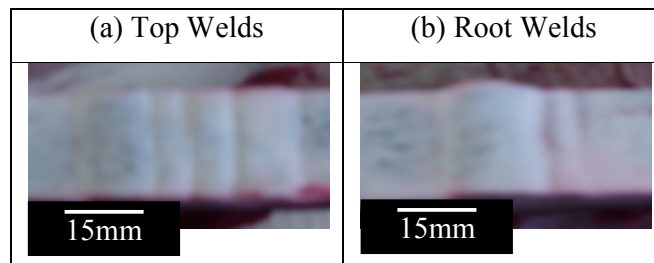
Liquid Penetrant Inspection of Specimen 1
